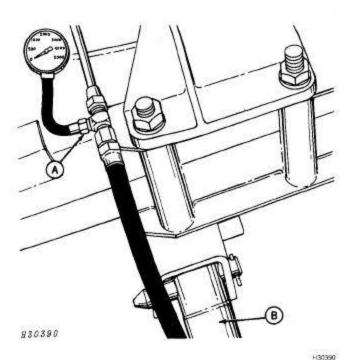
Test No. 2 - Test Port for Solenoid Control Valve
